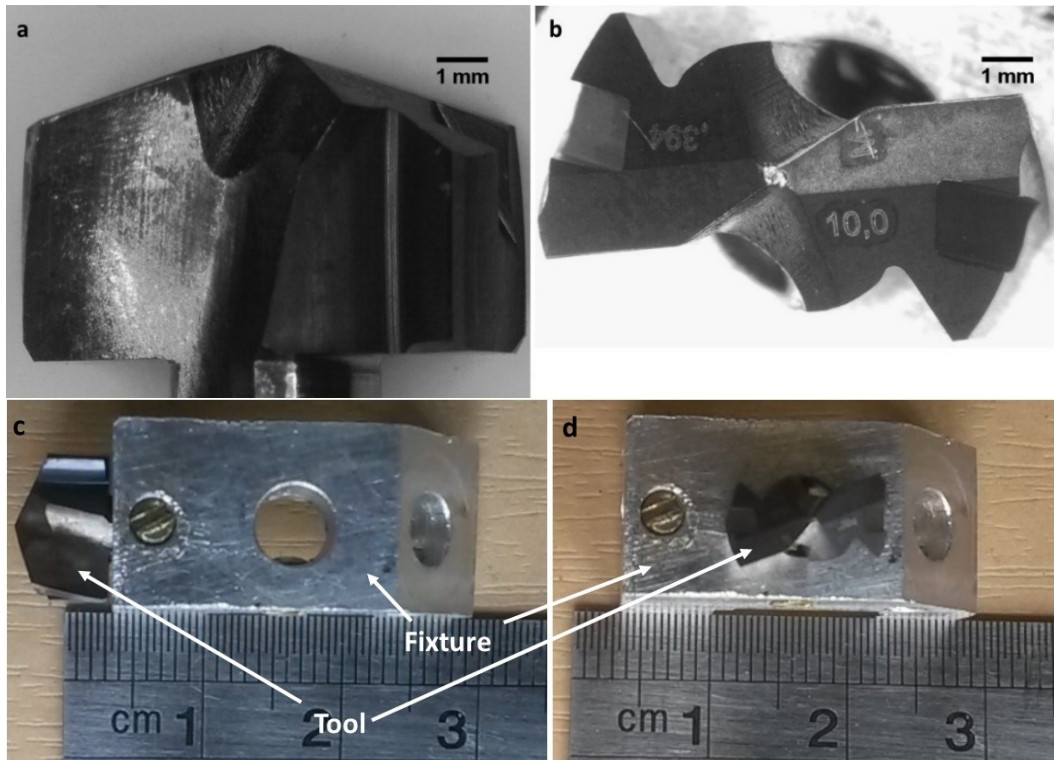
Drill insert photos: (a) rake view and (b) flank view. Drill bit position on the fixture for observation using Scanning Electron Microscope (SEM): (c) rake view and (d) flank view.
